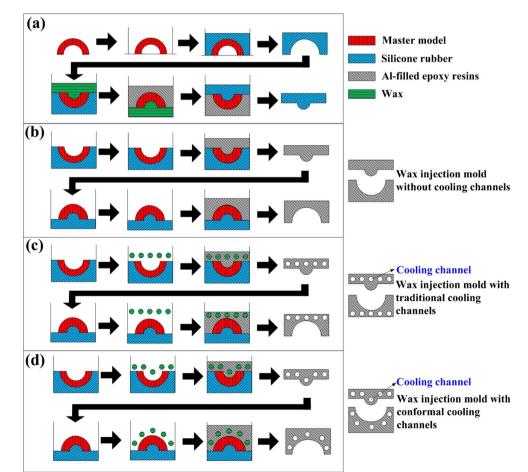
Process layouts for fabricating a bridge tooling, b wax injection molds without cooling channels, c wax injection molds with conventional cooling channels, and d wax injection molds with conformal cooling channels
